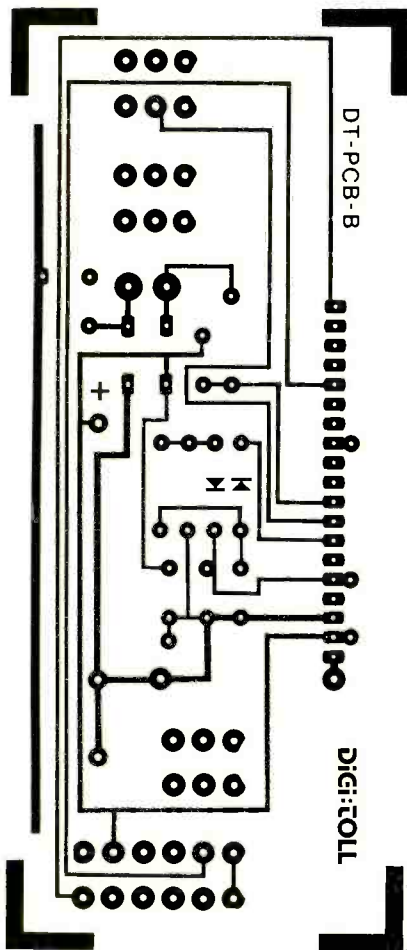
FOIL PATTERN for rear (solder side) of back board is shown full-size. Switches are on this board.
